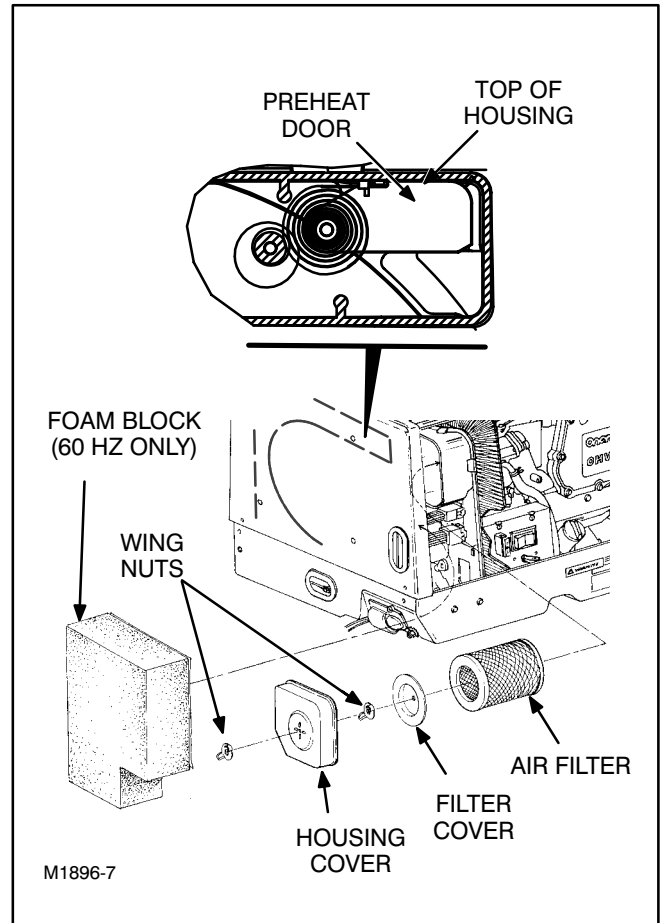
AIR FILTER AND PREHEATER ASSEMBLY
